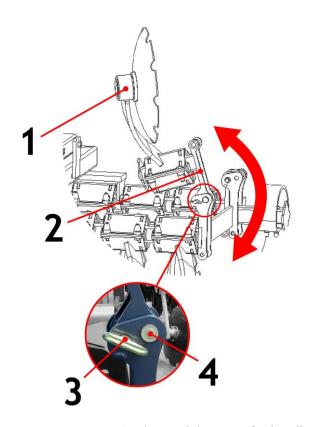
Outline disc in transport position (1 - disc with bearing, 2 - handle / hinge, 3 - position locking pin, 4 - hinge pin)
